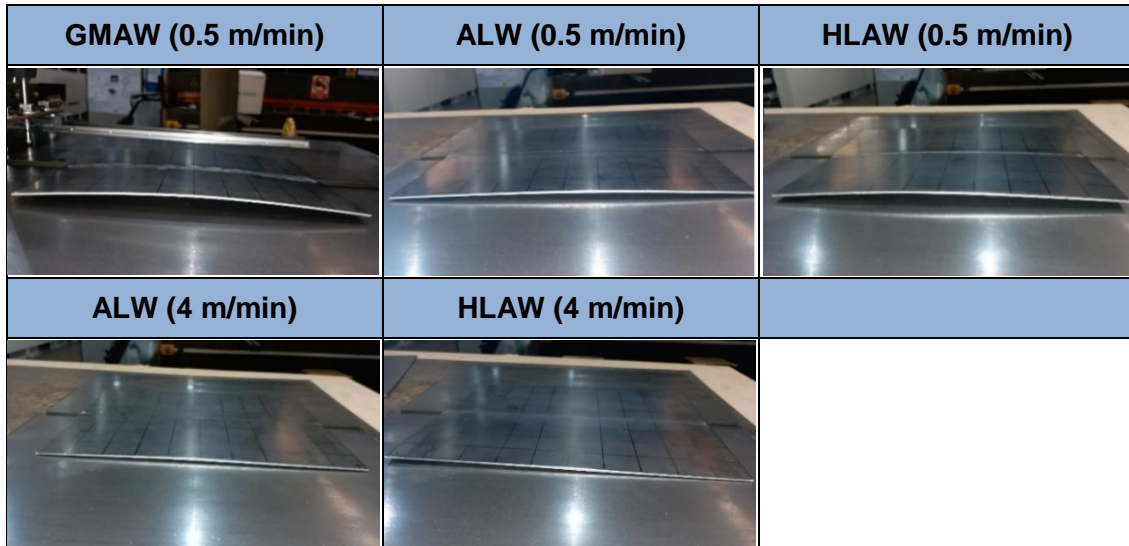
Samples welded by different welding processes at different travel speeds – 2 mm thickness
